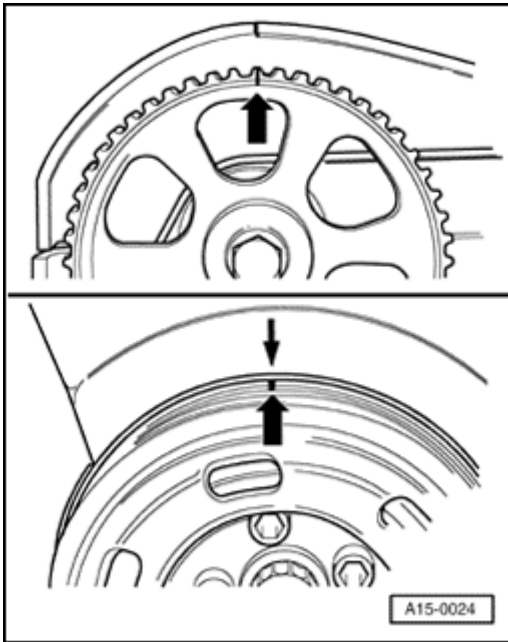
Setting Crankshaft To Markings For TDC Of No. 1 Cylinder
